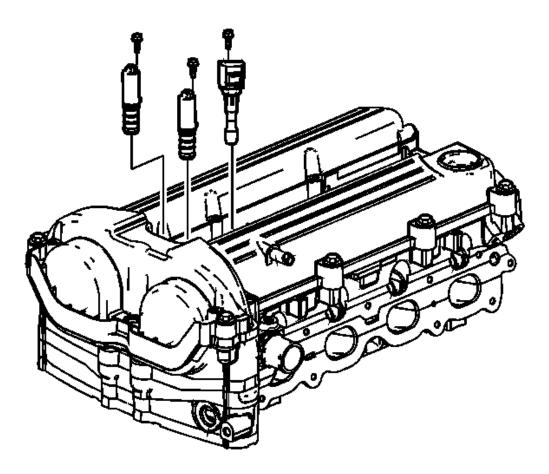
View Of Intake Manifold Courtesy of GENERAL MOTORS CORP.
